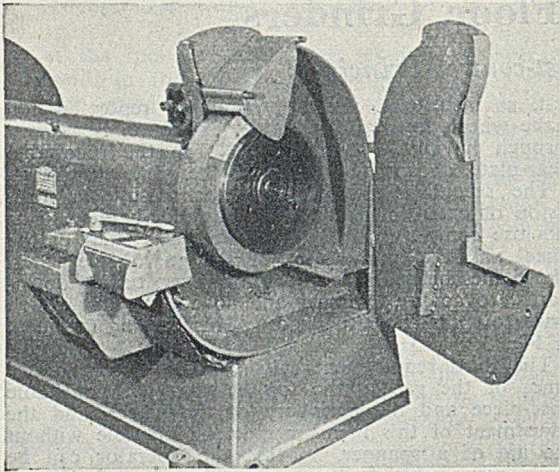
Re-designed Floor Grinder, with the Wheel Housing exposed to show the Baffling Arrangement.
